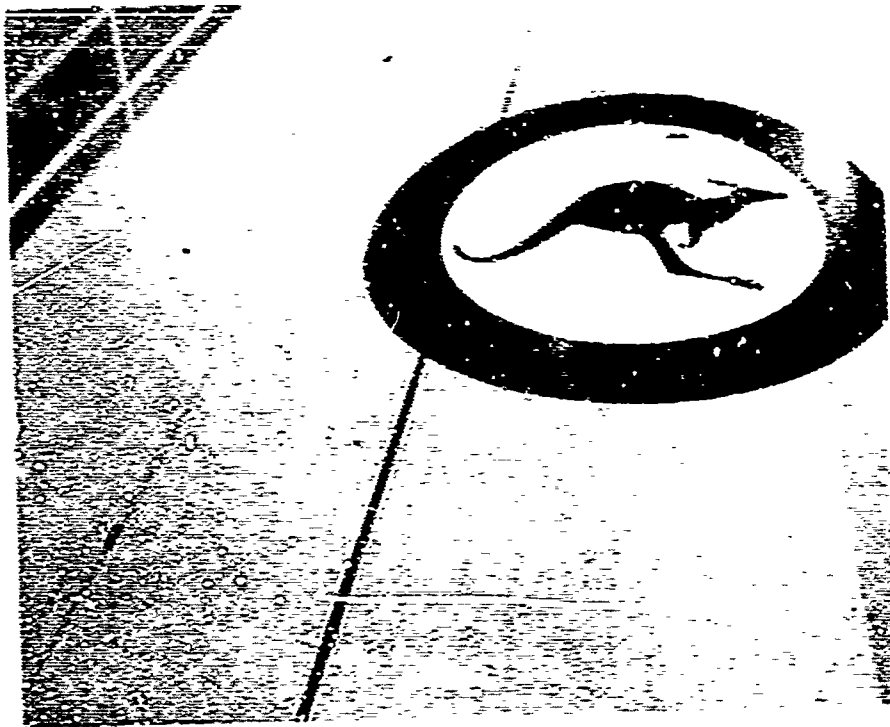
CLOSEUP VIEW OF UPPER SURFACE OF STARBOARD WING
